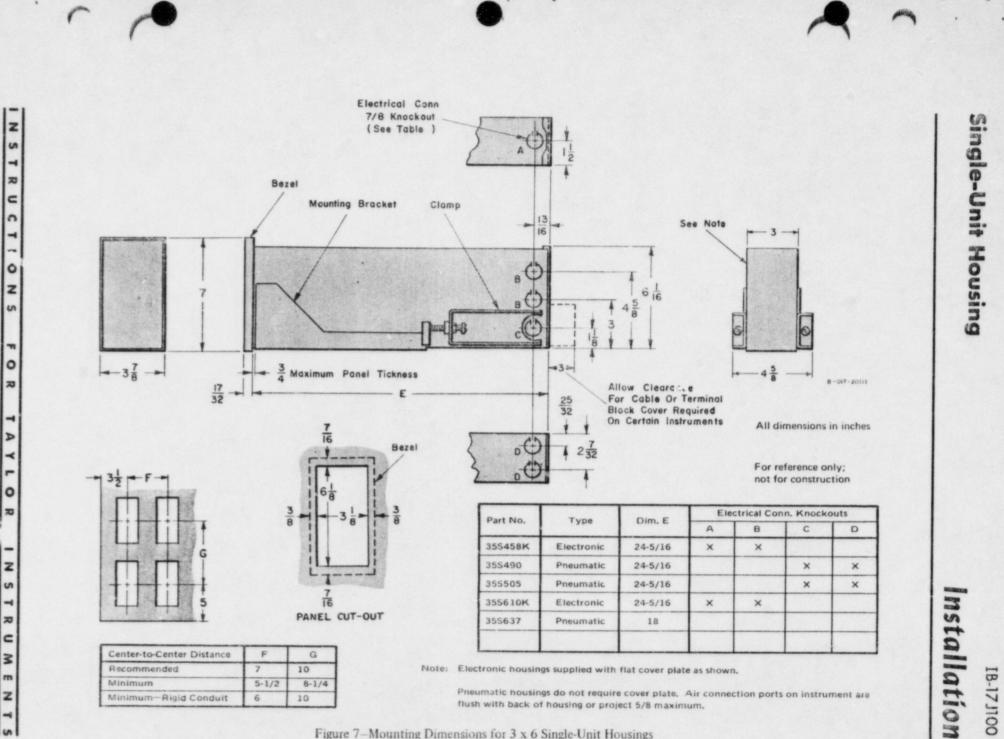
Mounting Dimensions for 3 x 6 Single-Unit Housings
